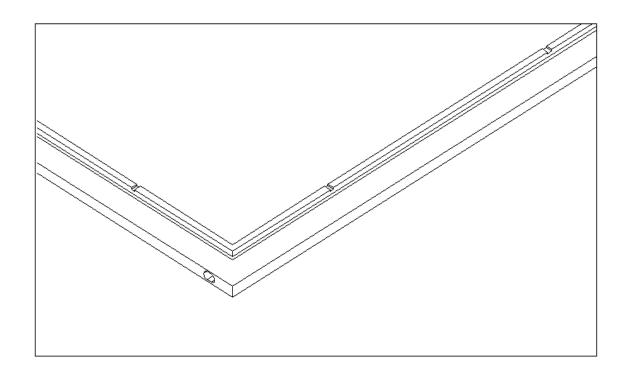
Detailed drawing of the gas distribution channel machined in the 3 mm frame.
